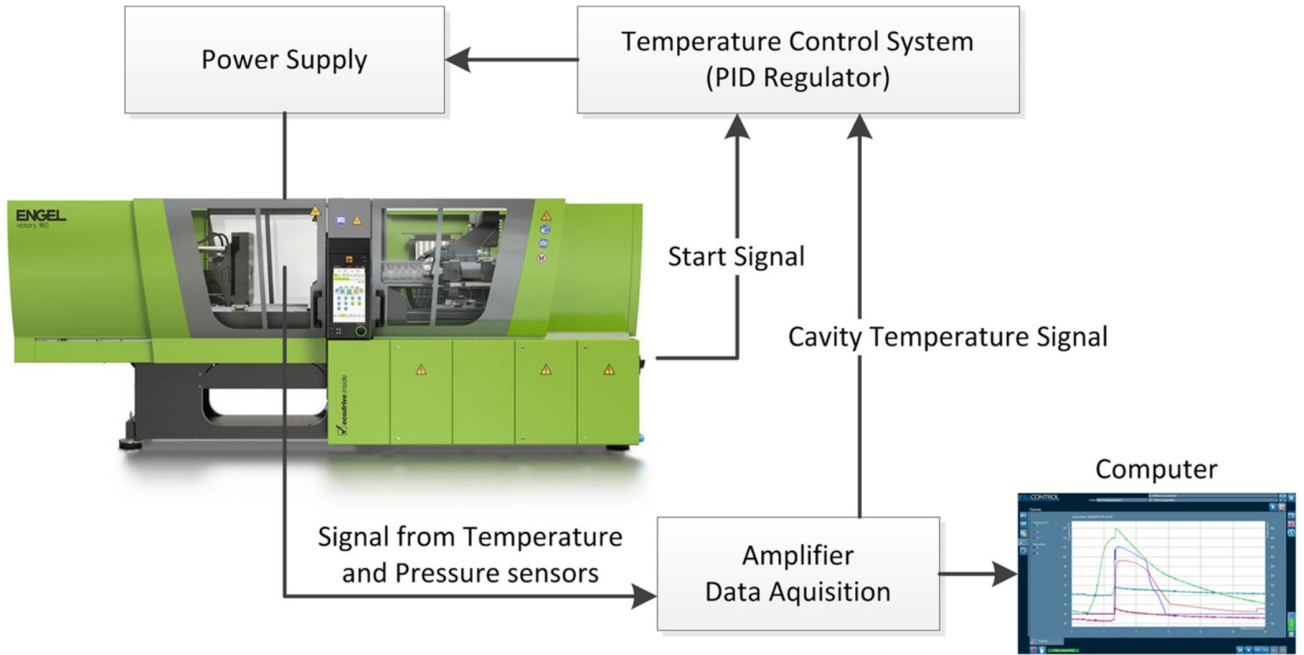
Experimental setup with the coupling between the molding machine and the power supply
